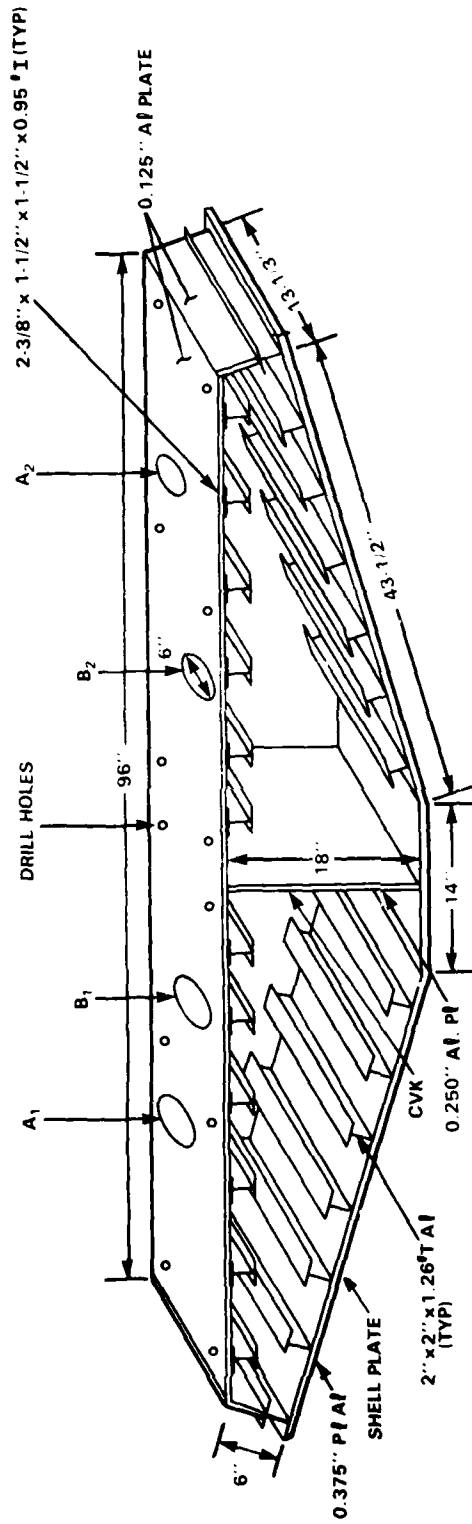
Section Showing Frame 72 As-Built and after Structural Modifications
